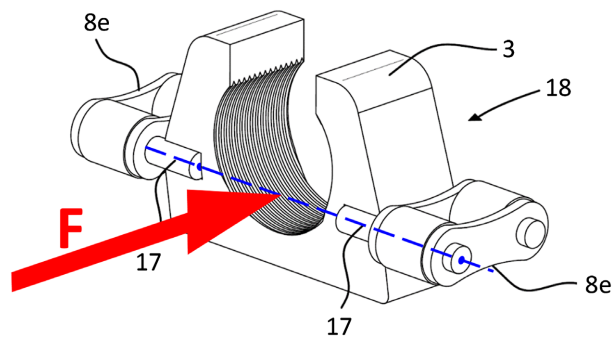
Inverted roller screw used to drive the threaded chain.
